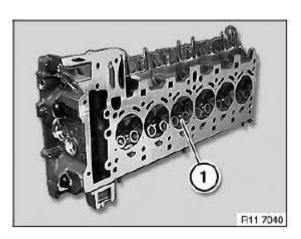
Identifying Cylinder Head With Inlet & Exhaust Camshafts Valve Courtesy of BMW OF NORTH AMERICA, INC.
